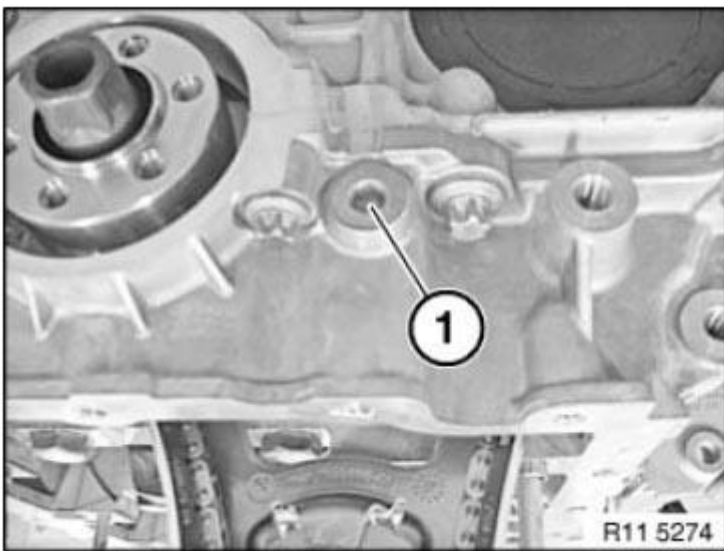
Identifying Screw Plug On Front Of Crankcase
